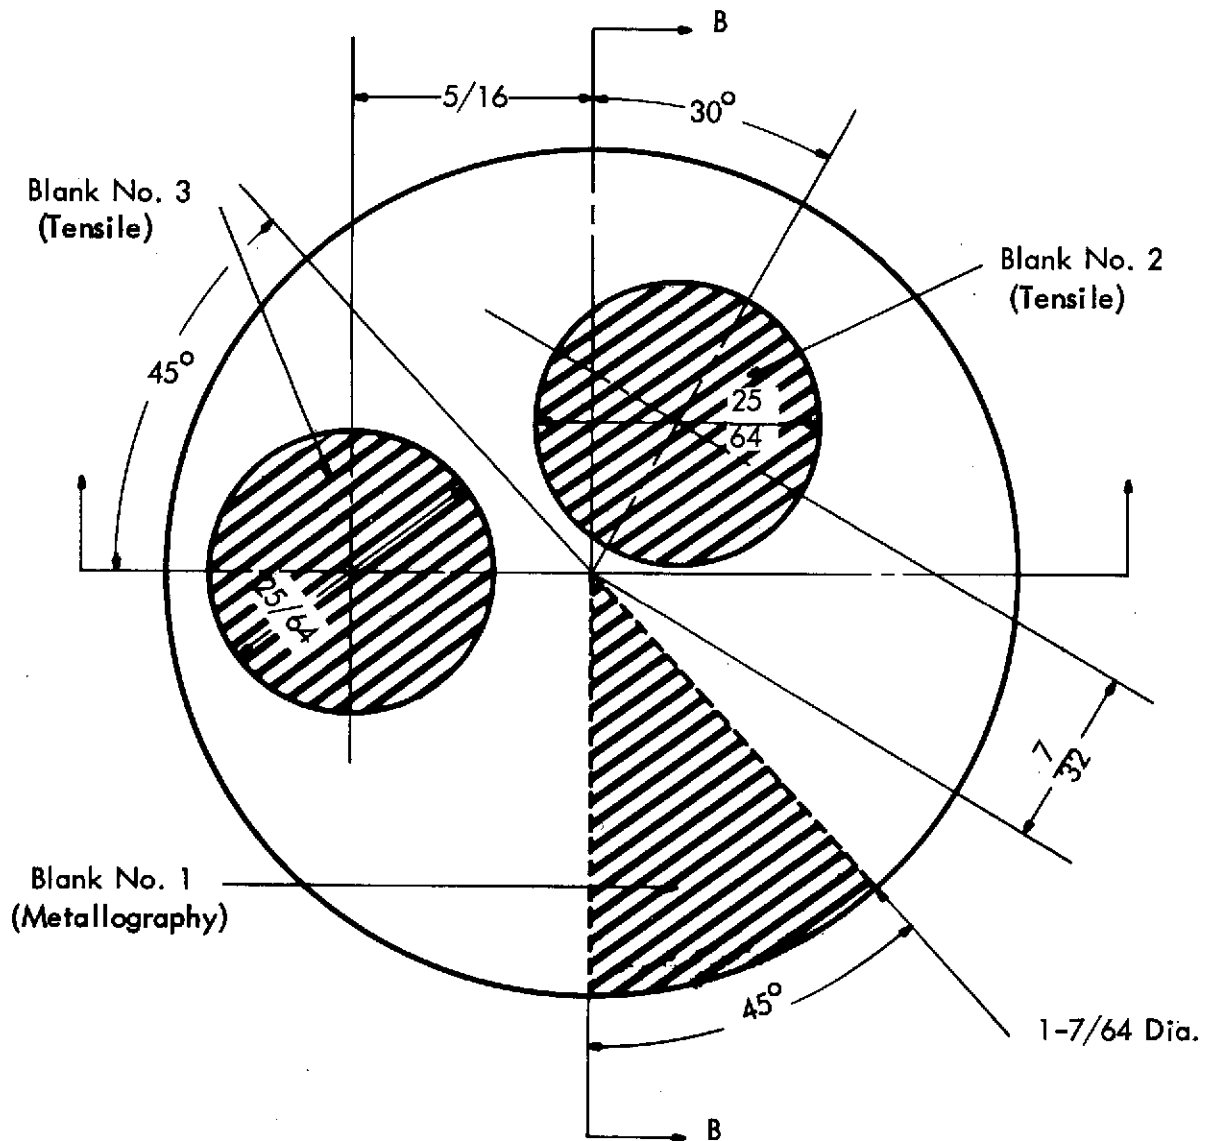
Sketch Showing Location of Tensile and Metallographic Specimen Blanks Within Welded Type I Mismatch Specimen.
